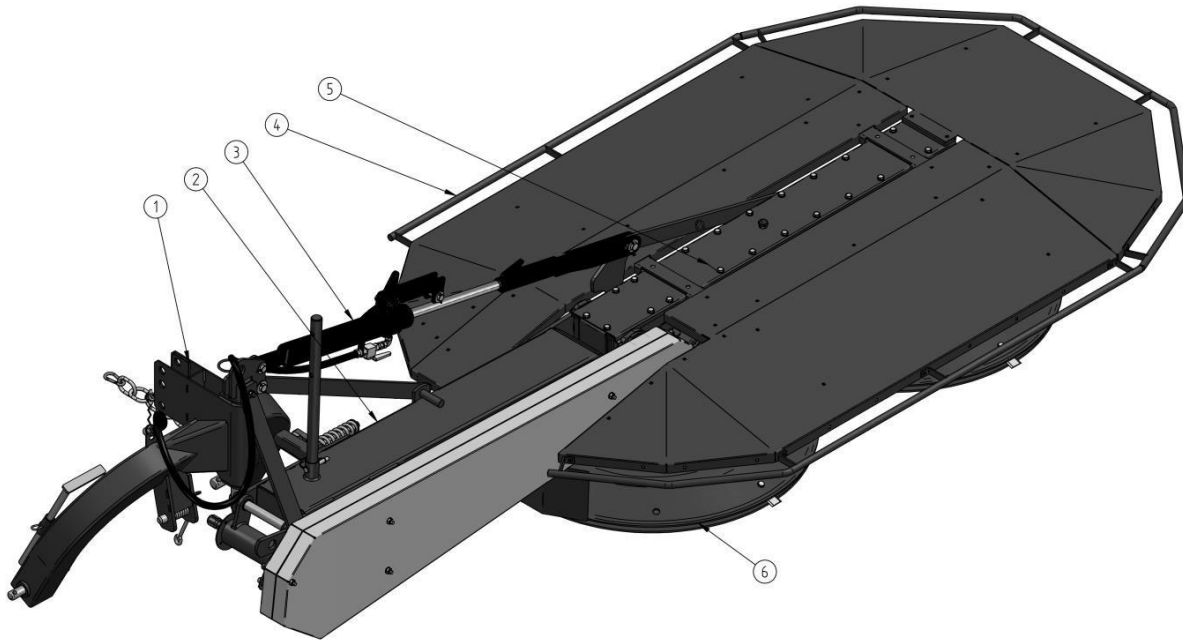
Overall machine construction: 1 - suspension frame; 2 – main chassis; 3 – hydraulic cylinder (depending on the model); 4 – cutting unit; 5 – cover assembly; 6 – working section of cutting unit; 7 – support foot.
